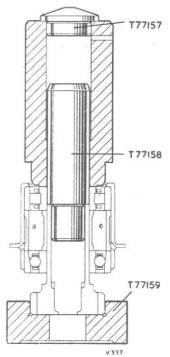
Pressing the vertical accessory drive assembly on to the driven gear
